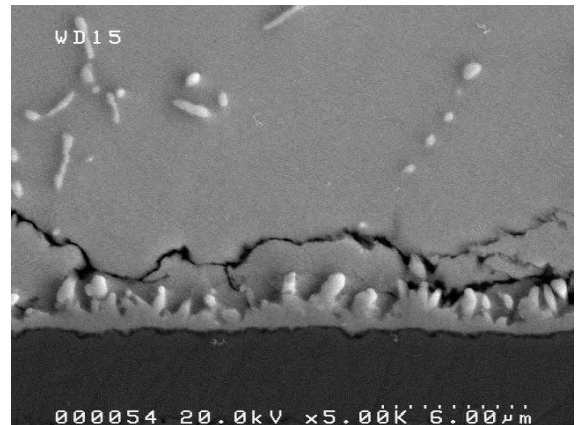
Board Side Failure of BGA with SAC305 Solder on ENEPIG Finish, 170 T_g Board
